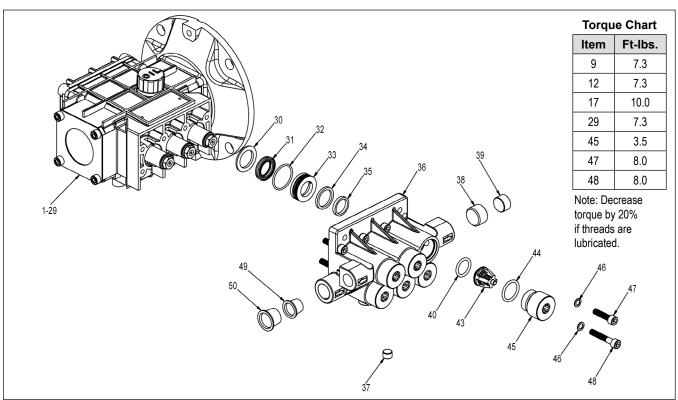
Discontinued High Pressure Pump Parts - Exploded Diagram
